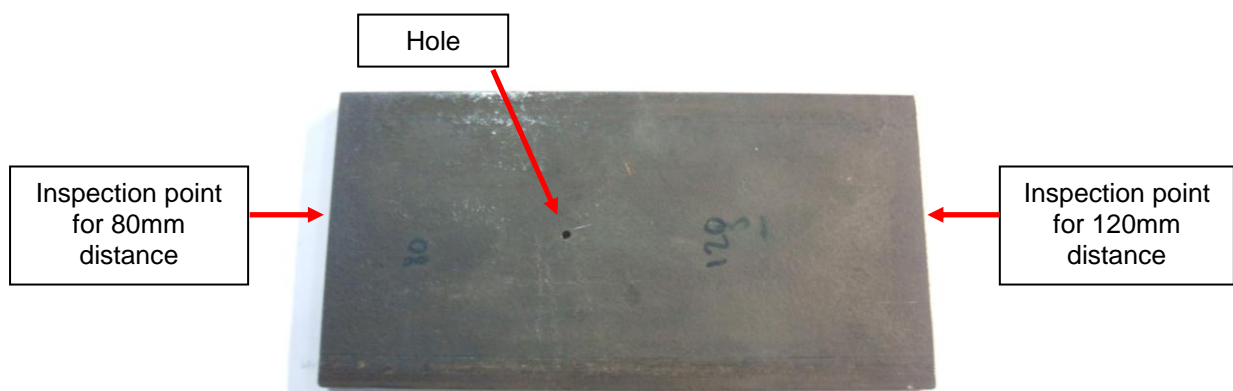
Test specimen for ultrasonic method, showing hole drilled 80mm from one edge and 120mm from the other edge
